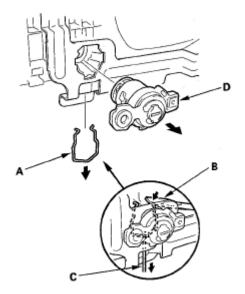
Pushing Top Of Retainer Clip With Flat-Tip Screwdriver Courtesy of AMERICAN HONDA MOTOR CO., INC.
